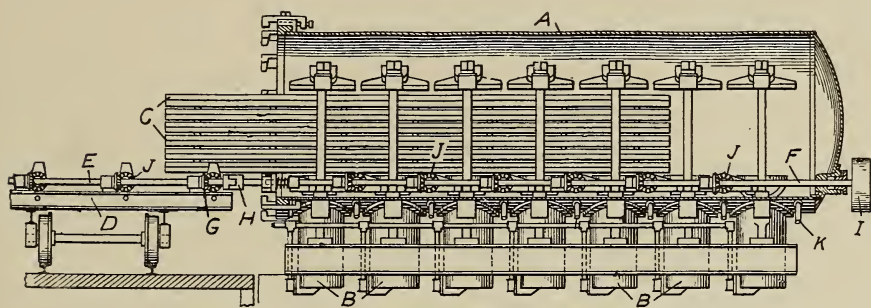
THE SHAW HORIZONTAL VULCANIZER PRESS.
